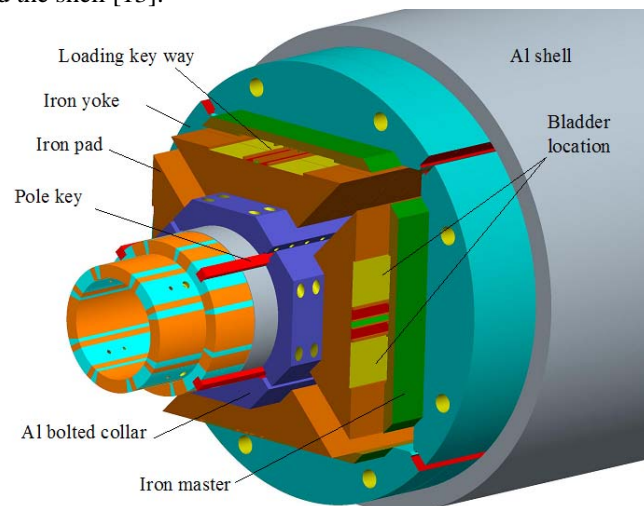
Exploded view of the mechanical structure showing dummy coils.
